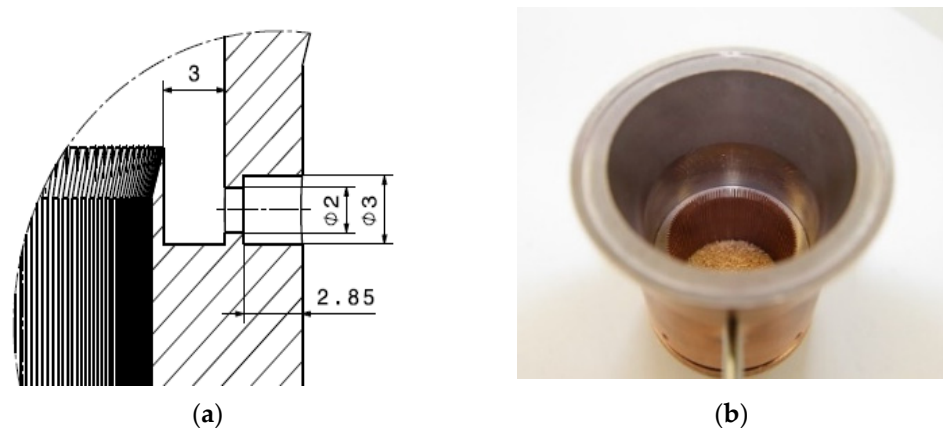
Inner view of HPEE mock-up: (a) illustration of the reservoir; (b) manufactured grooves and sintered porous evaporator.
